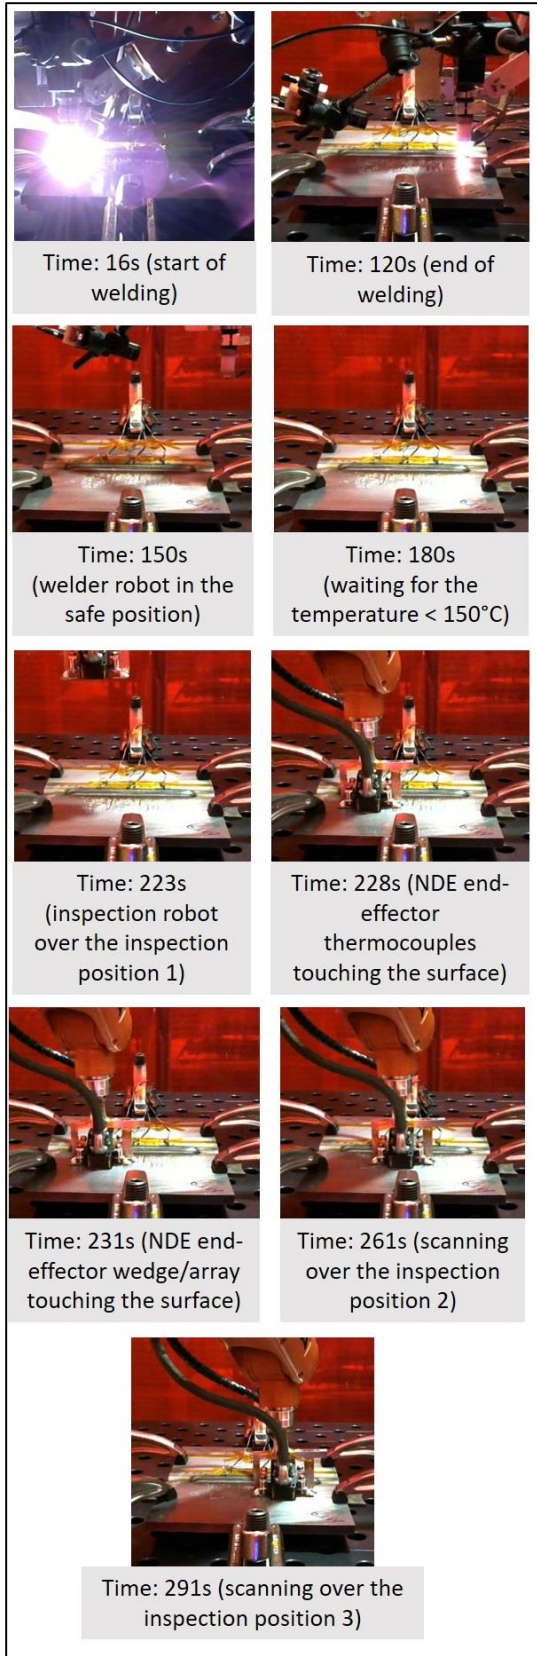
IN-PROCESS WELDING AND INSPECTION METHODOLOGY
